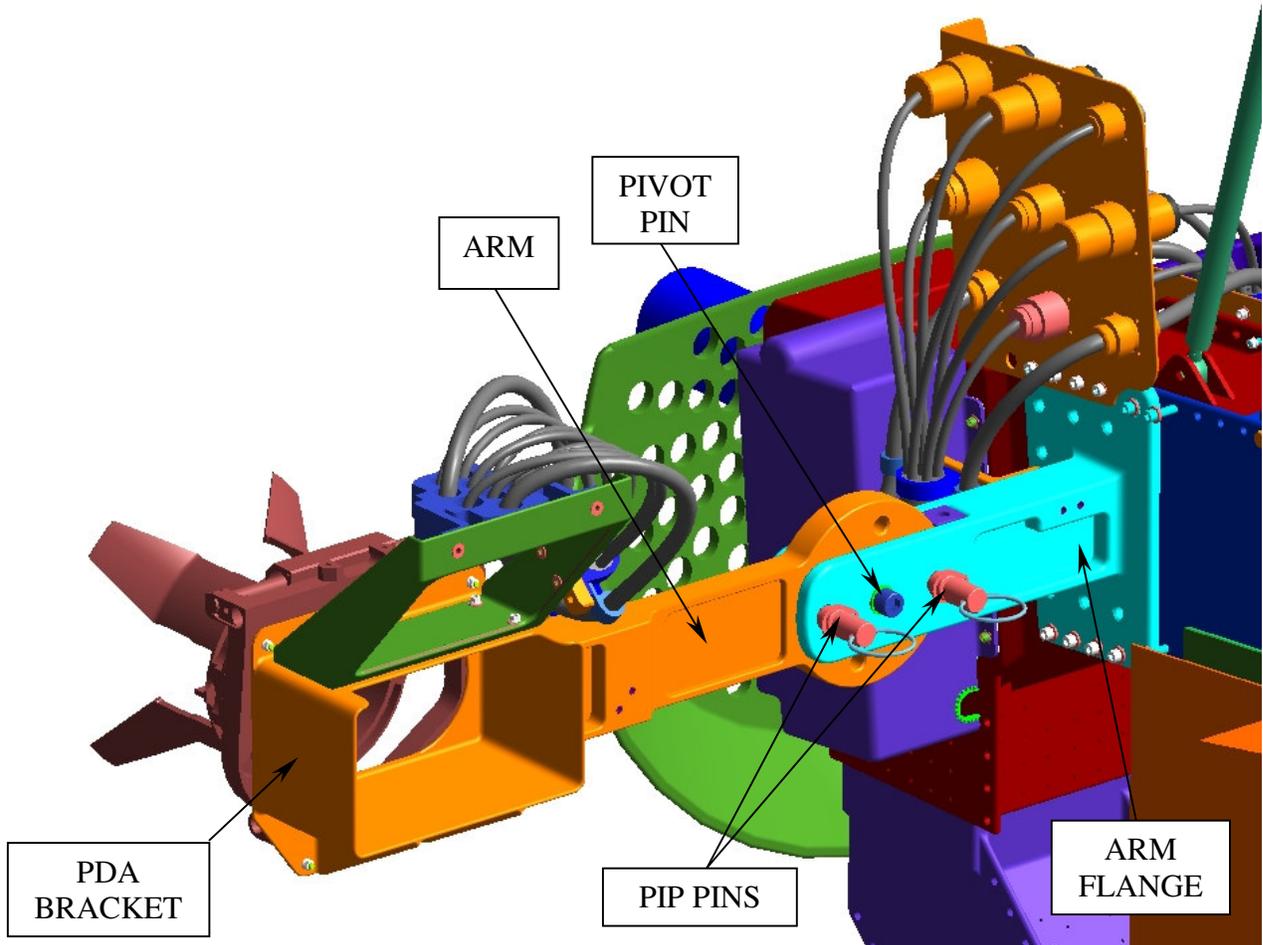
ROEU Assembly Nominal Configuration (Iso View from Port Side)
